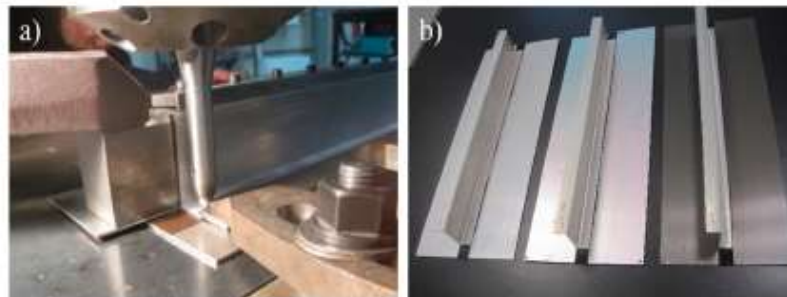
(a) Setup for the FSW process and (b) example of completed FSW coupons C4, C5, and C6.
